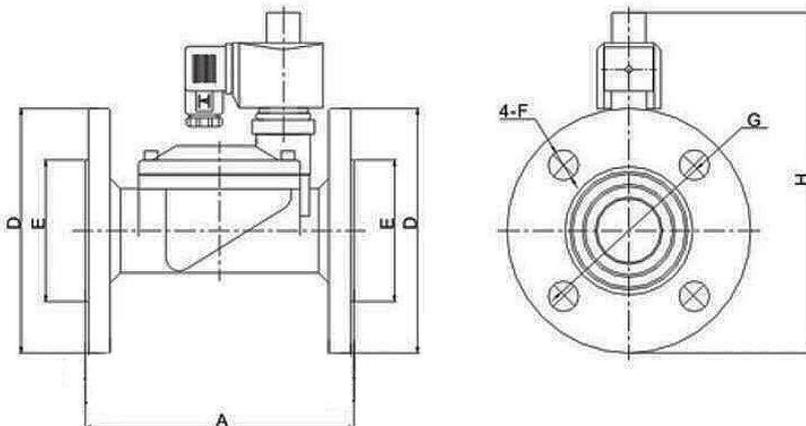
Valve dimensions (body material - AISI 304 stainless steel)
